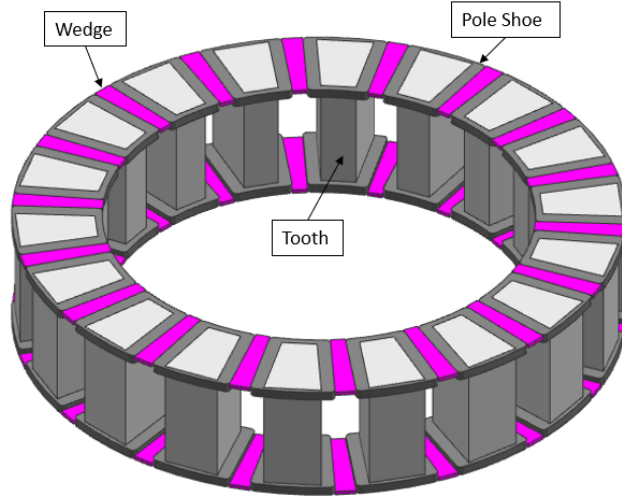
The stator tooth, pole shoe, and wedge assembly.
